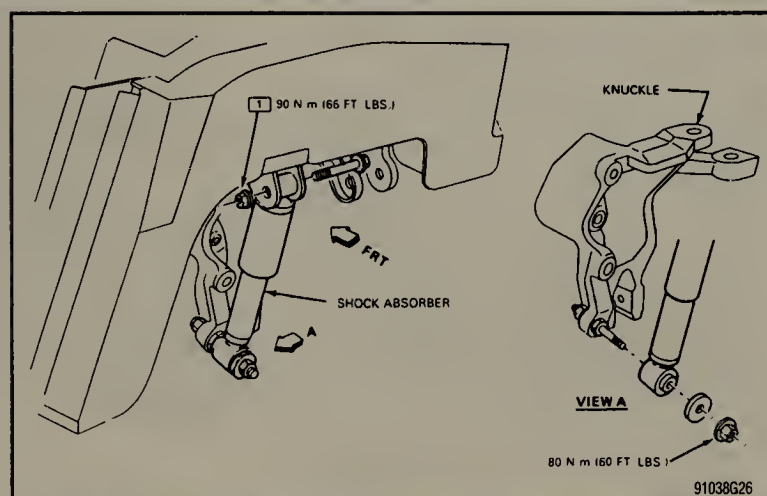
Exploded view of the shock absorber attachment—1984–87 vehicles
